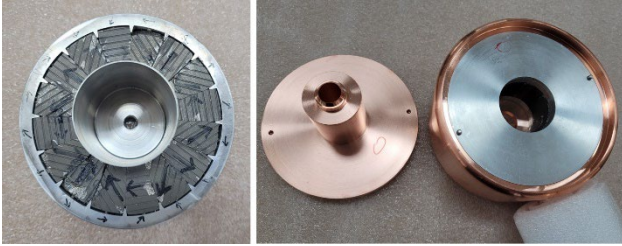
Fabricated PMQ and pre-assembled drift tube.
